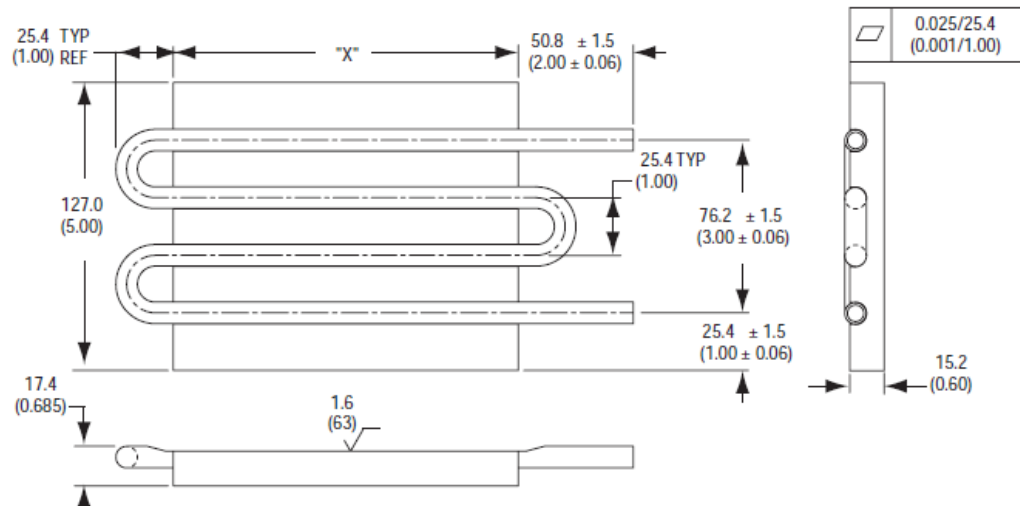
Aavid Thermalloy cold plate schematic drawing with dimensions.
